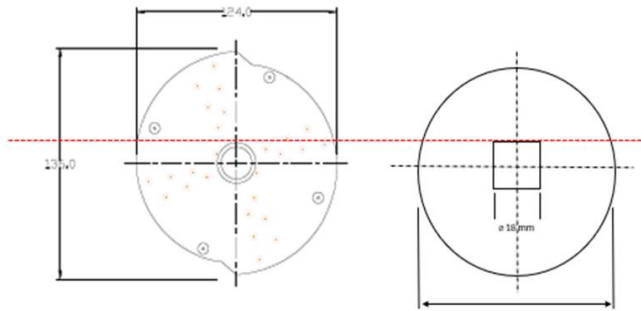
Symmetrical design between the design of the base cross-section of the mold post and the base cross-section of the mold component.
